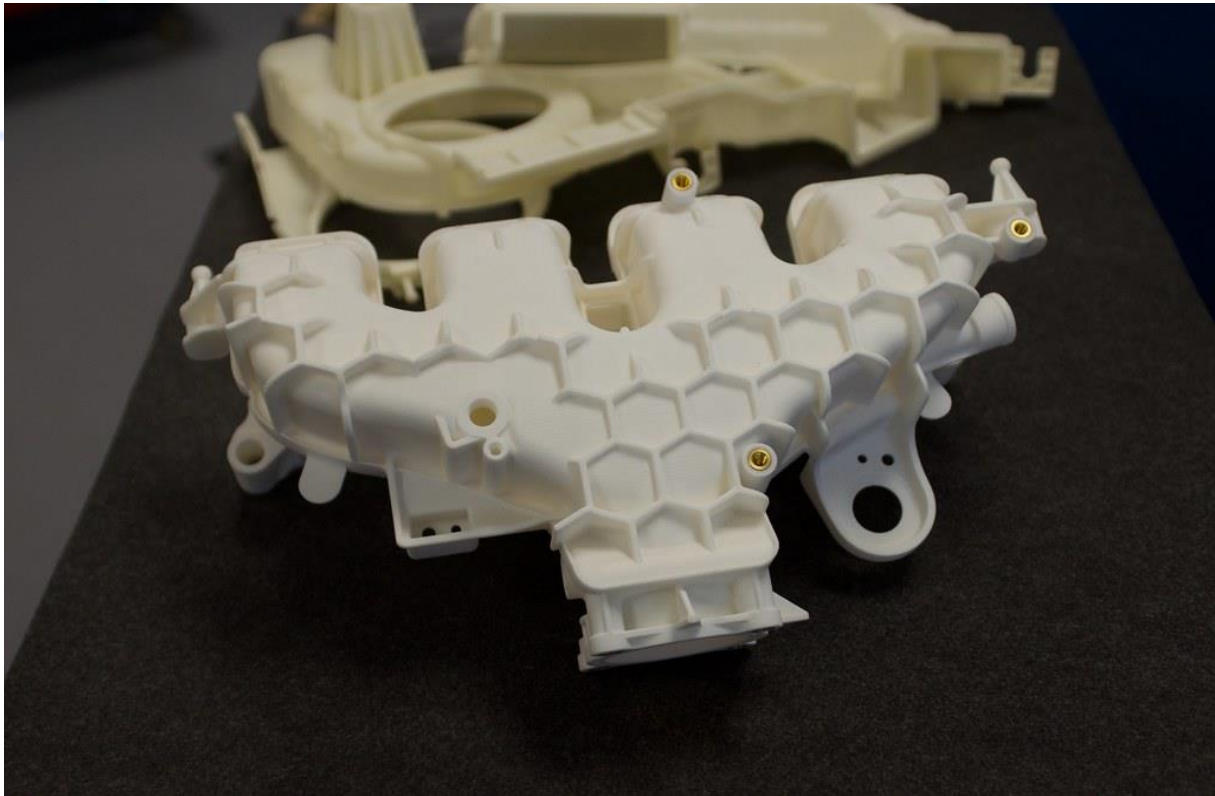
3D printed car parts (picture by John Biehler, licensed under CC BY-NC-SA 2.0)
